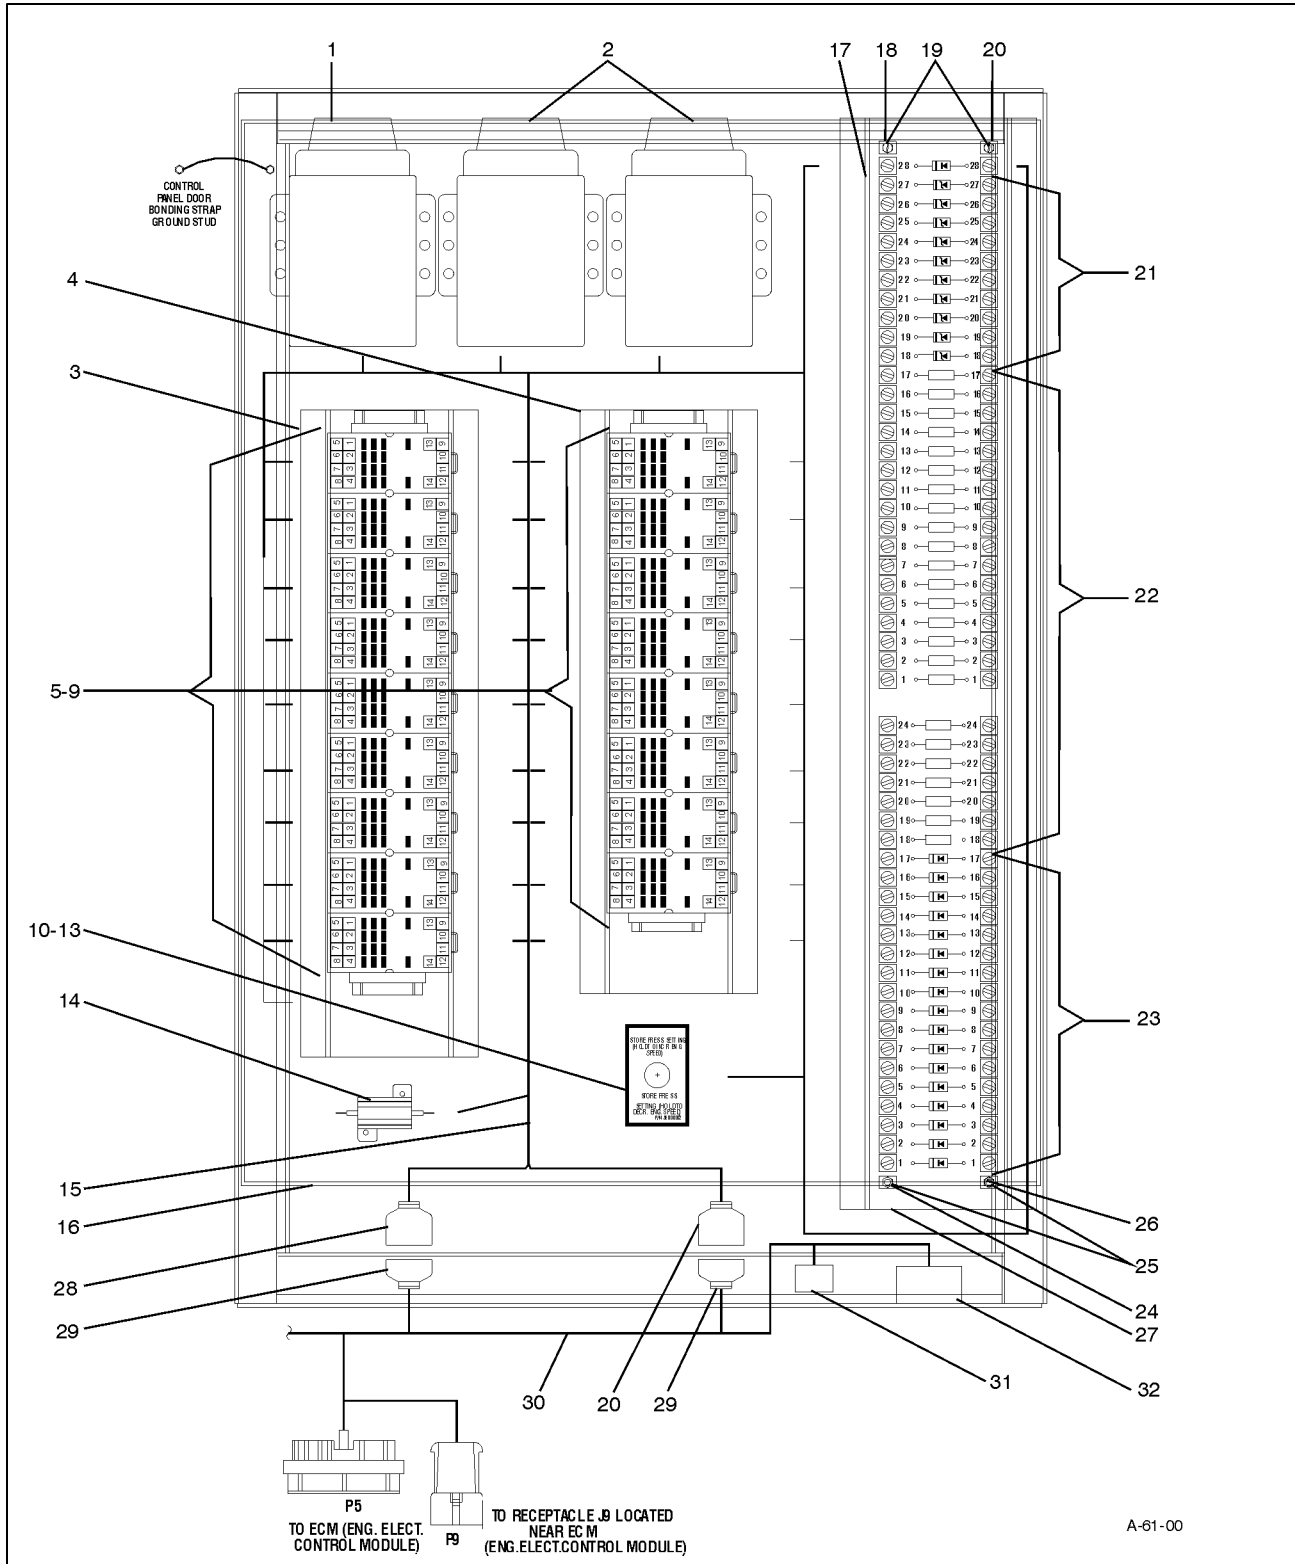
Control Panel, Assembly, Main Relay Panel (Sheet 2 of 2)
